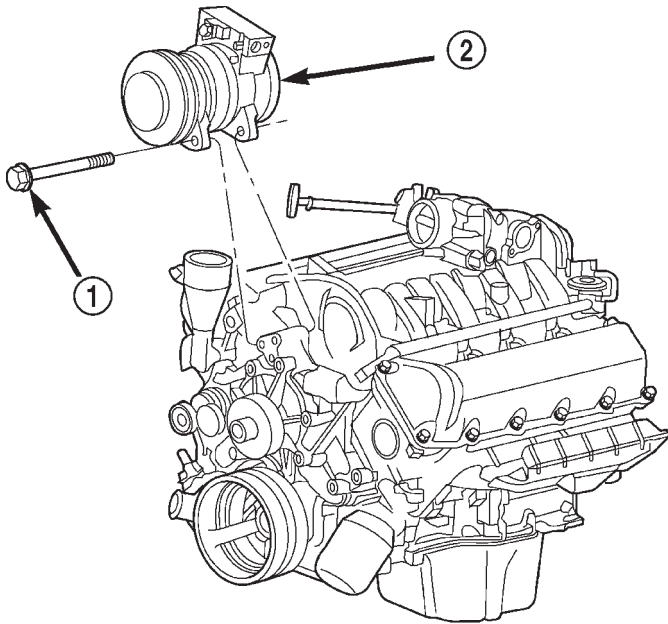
COMPRESSOR REMOVE/INSTALL - 4.0L ENGINE
